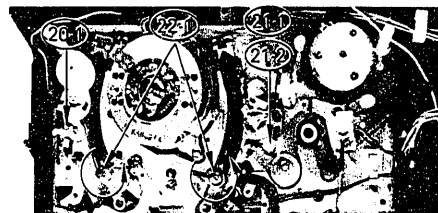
Supply/Take-up Guide Pole, Guide Roller
